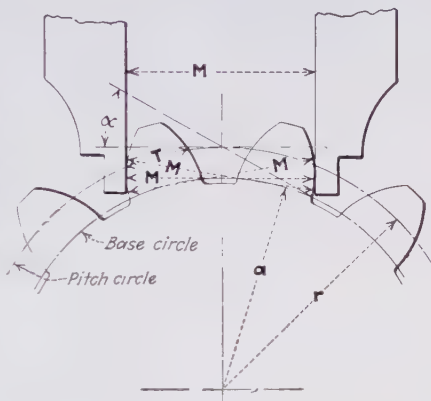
Measurement of tooth thickness by vernier caliper.
